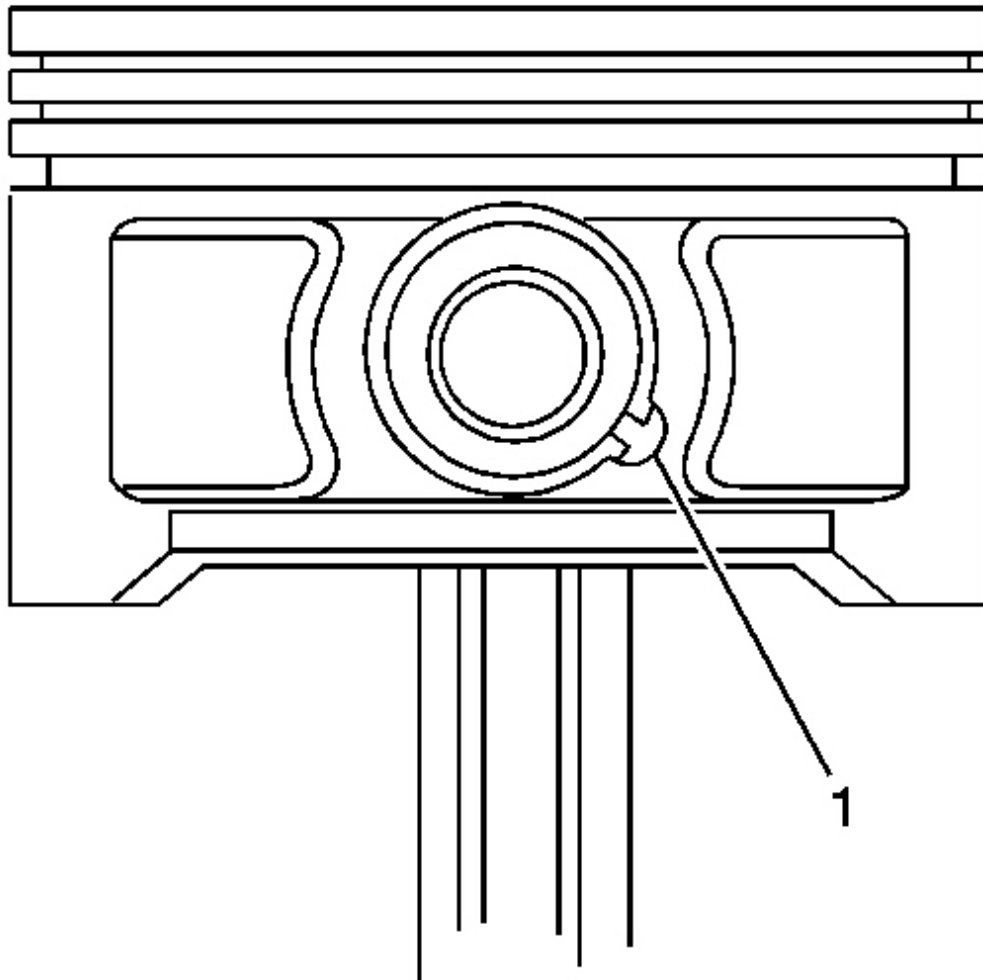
View Of Piston Pin Retaining Clip & Cutout Area Of Pin Bore
